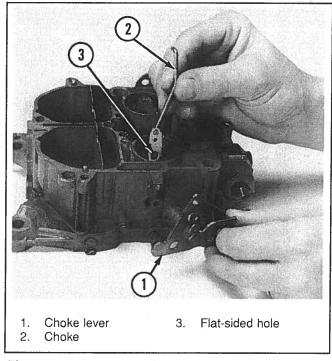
Installing Choke Rod And Lever To Vacuum Break
